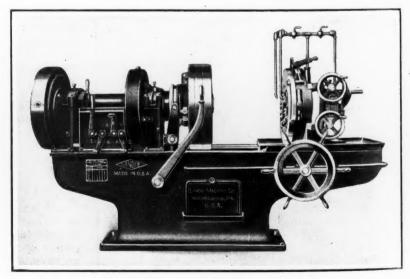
Landis 4-inch Pipe-threading and Cutting-off Machine
